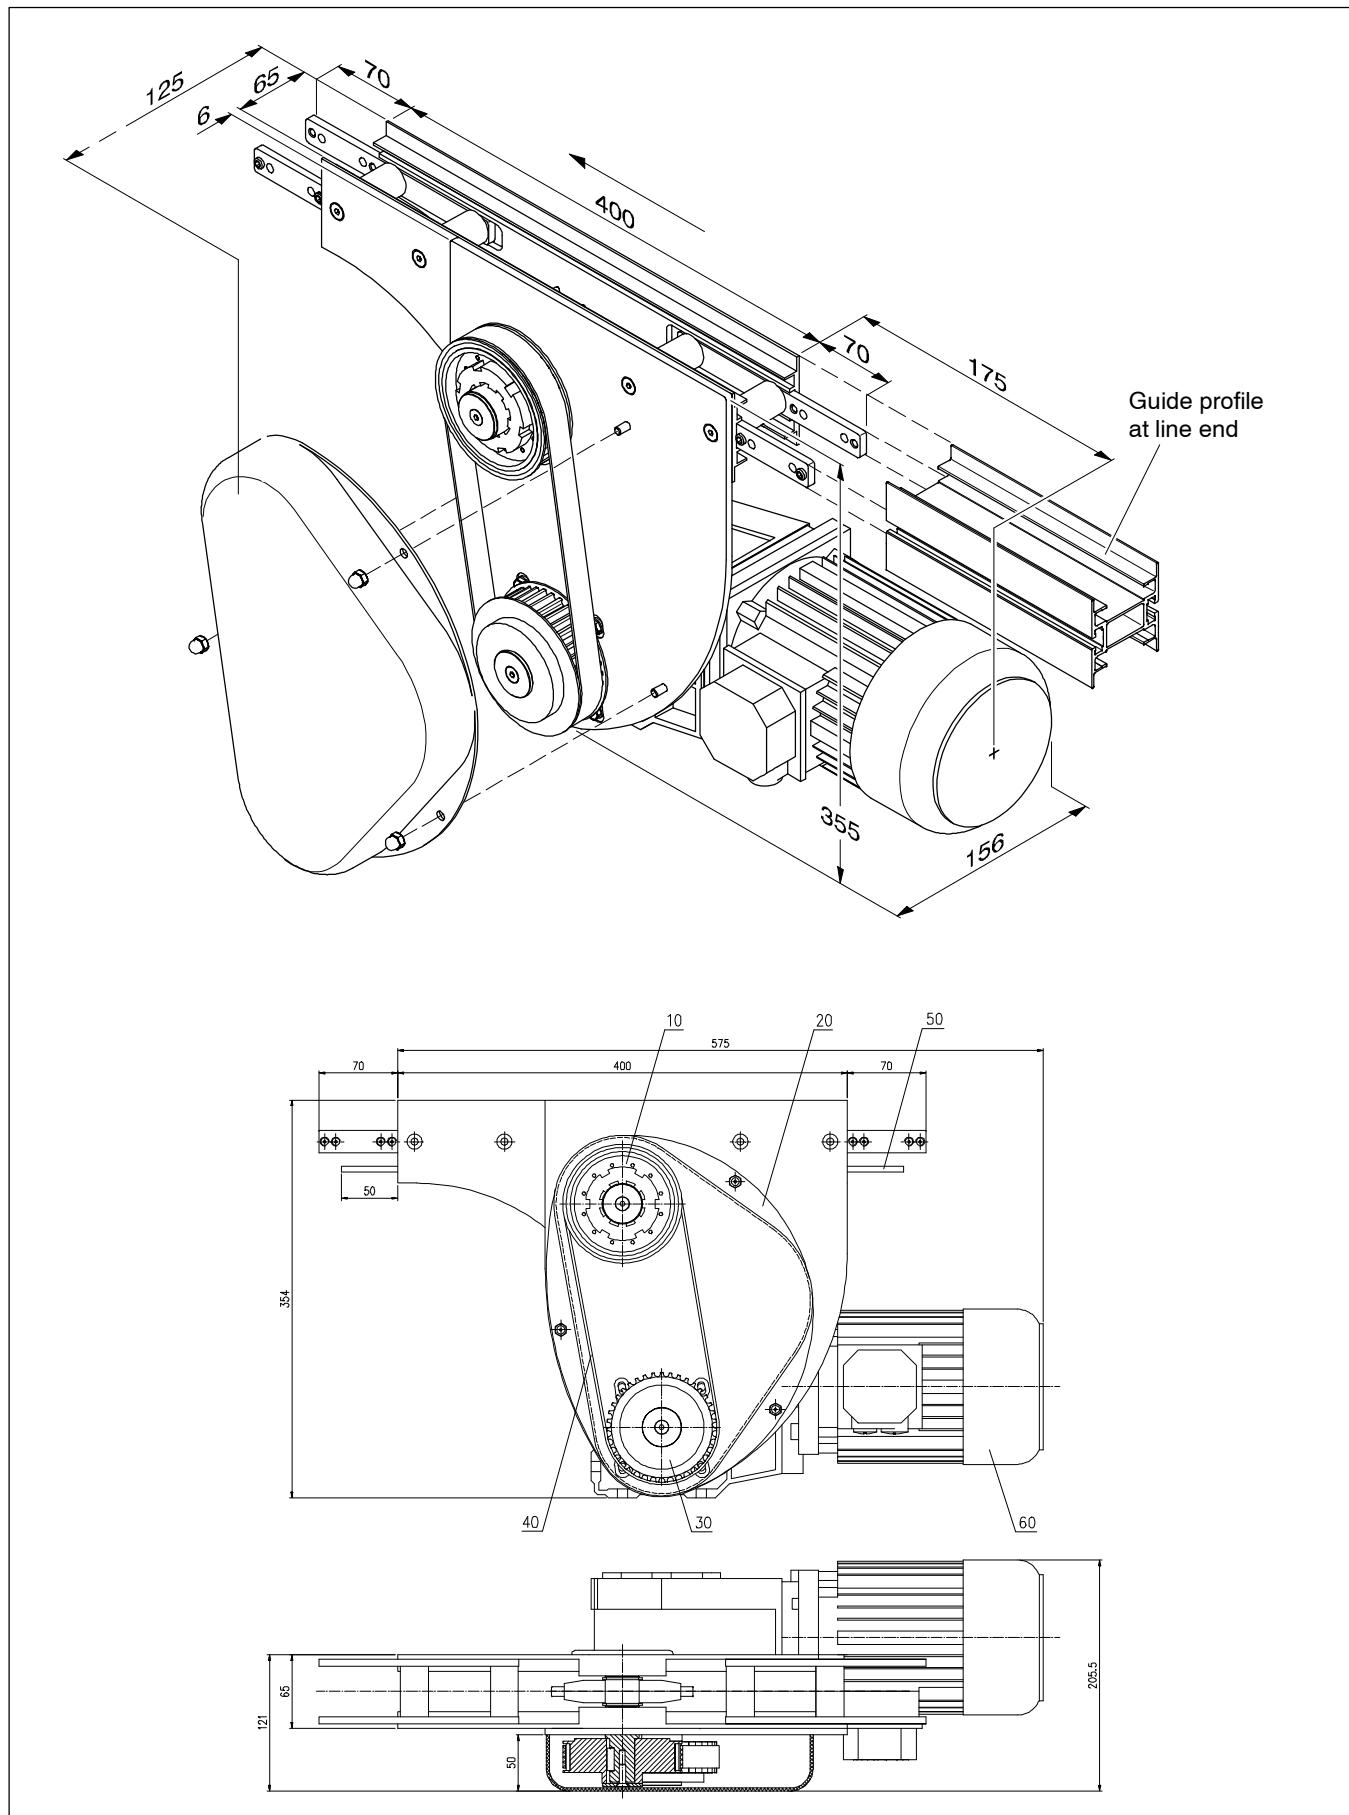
CS 065 SL centre drive, with belt reducing gear - left-hand version
